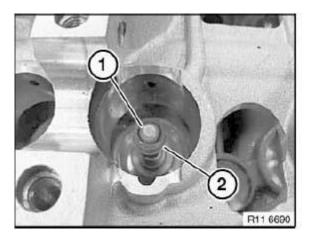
Identifying Valve Stem Seal And Mounting Sleeve Courtesy of BMW OF NORTH AMERICA, INC.
